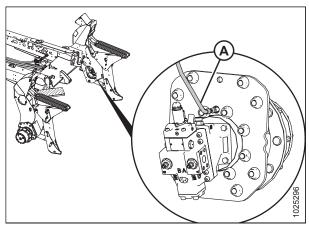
Left Wheel Motor Hydraulic Brake Hose
